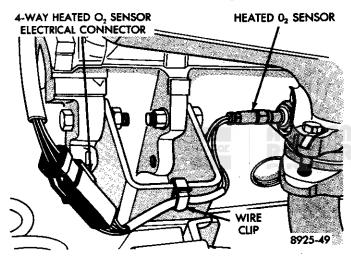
Heated Oxygen Sensor Electrical Connection—5.2L and 5.9L Engines
